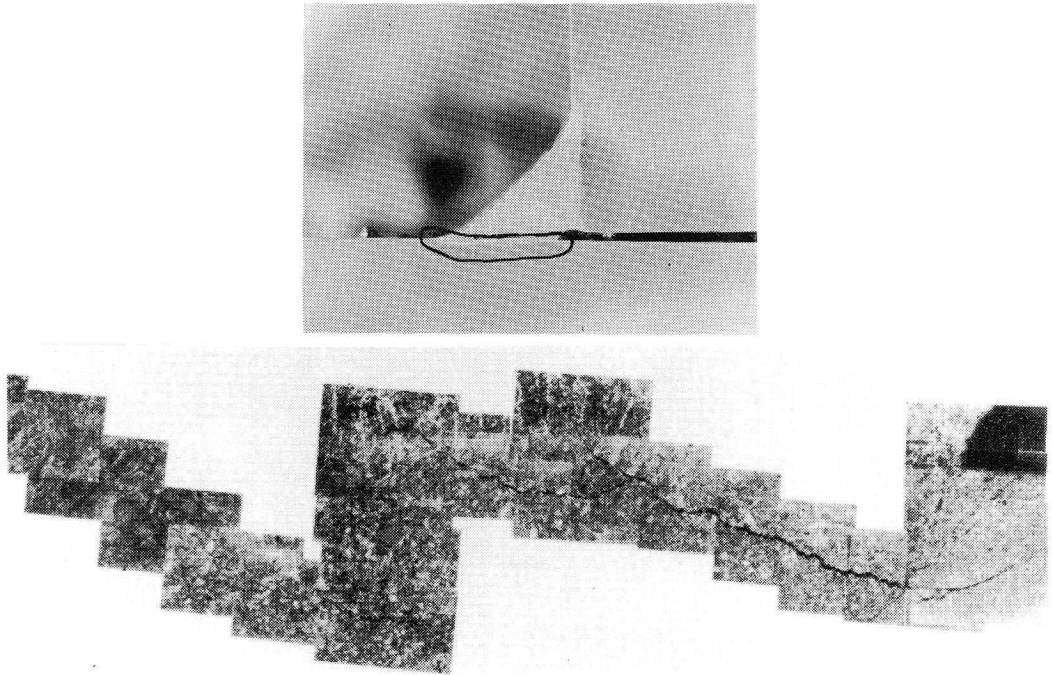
Macro and micro structures adjacent to the weld crack of Non-restraint T type fillet test
